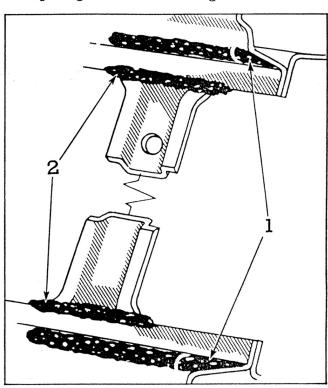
Applying 3-M Autobody Sealer to Windshield Opening
